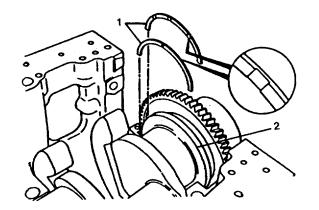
Crankshaft Thrust Bearing Removal/Installation.
